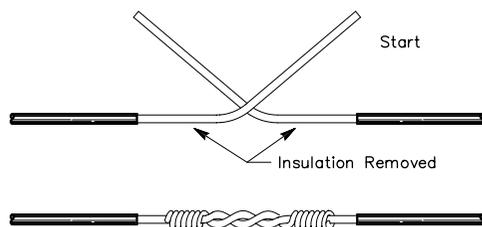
Correct method of splicing antenna wire. Solder should be flowed into the wraps after the connection is completed. After cooling, the joint should be sprayed with acrylic to prevent oxidation and corrosion.
